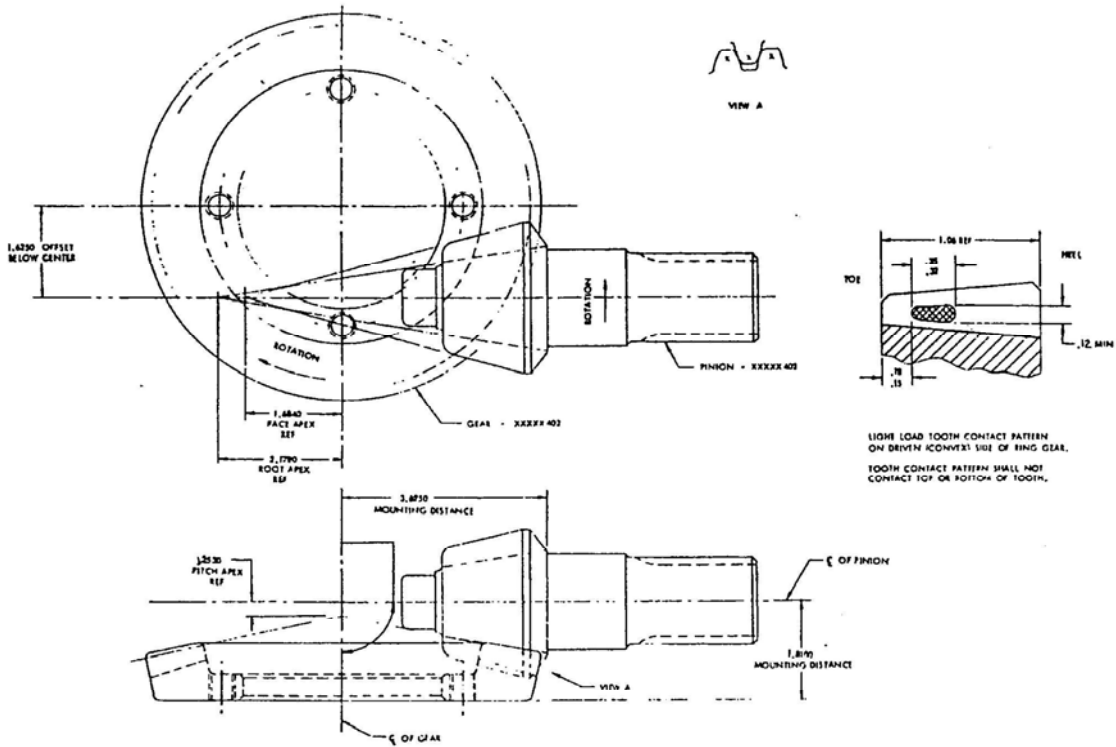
Example of drawing of zero bevel gear or spiral bevel gear.
